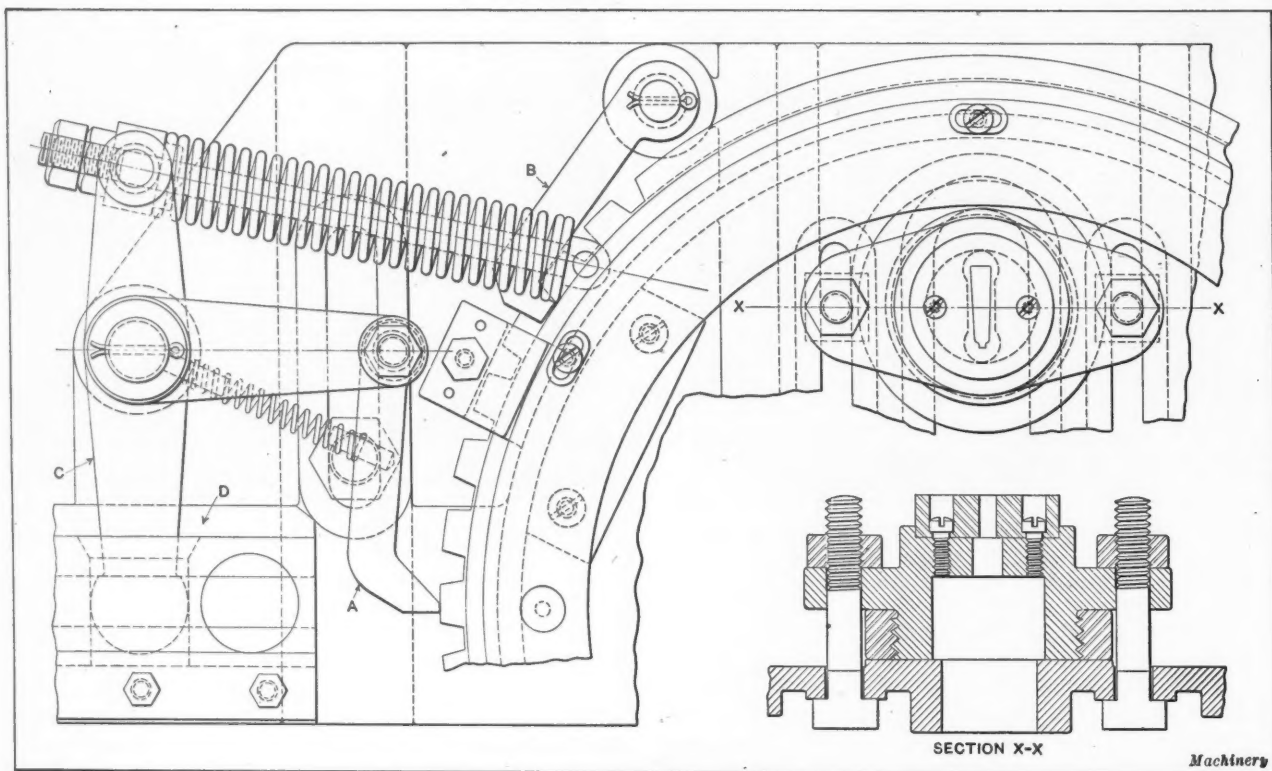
Plan View of the Universal Automatic Indexing Fixture used on Notching Presses
